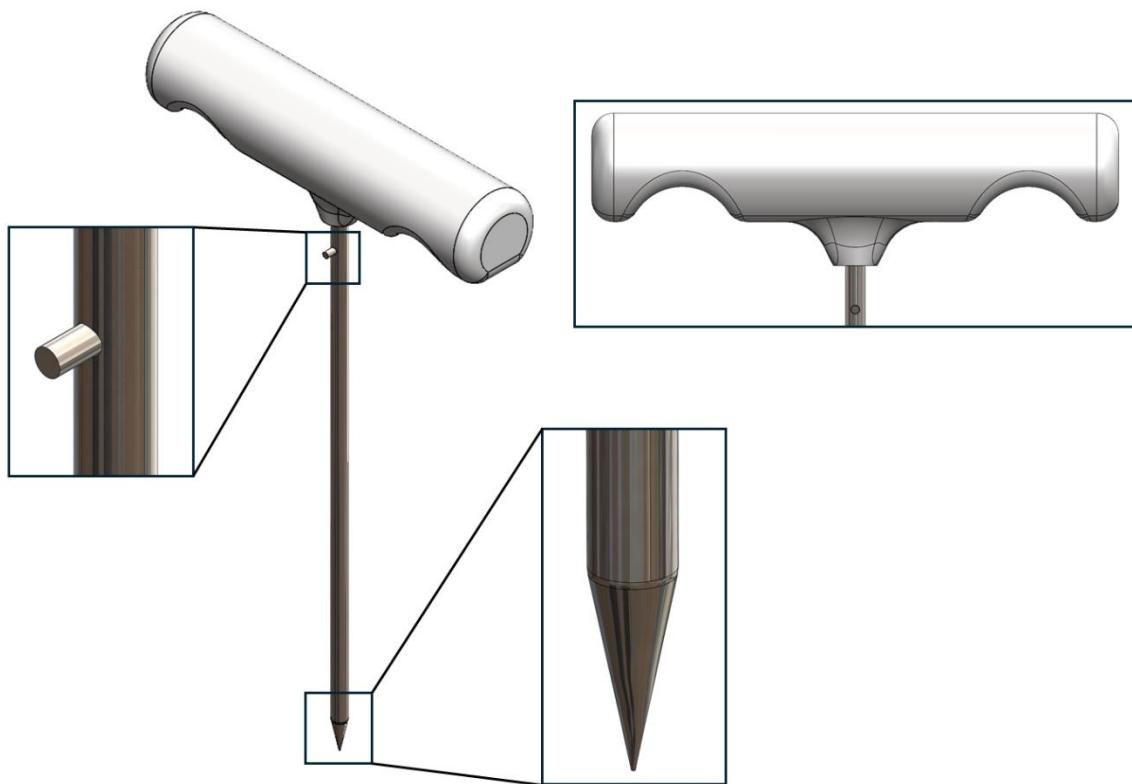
Stylet CAD model, which features the sharp tip, the ergonomic handle, as well as the three parts that make up the Stylet assembly (Stylet Shaft, Nub, and handle)
